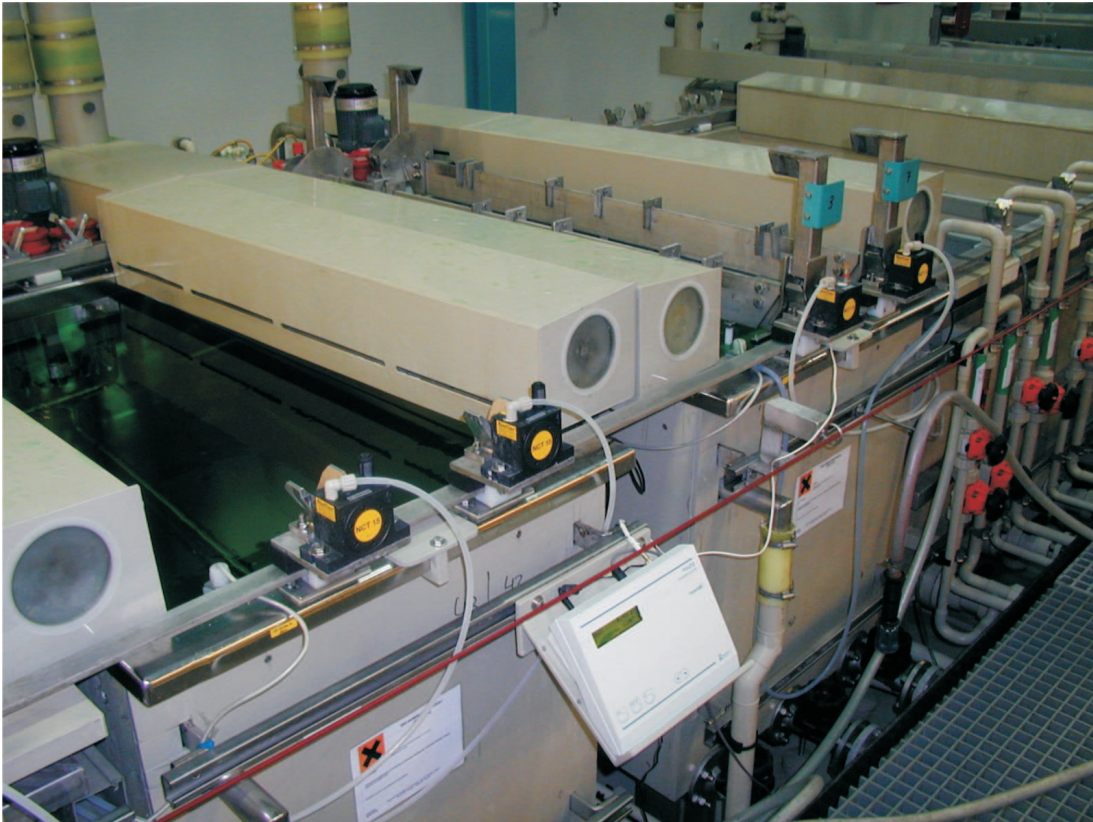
A part of electroless nickel immersion gold plating line used for PCB manufacturing.
